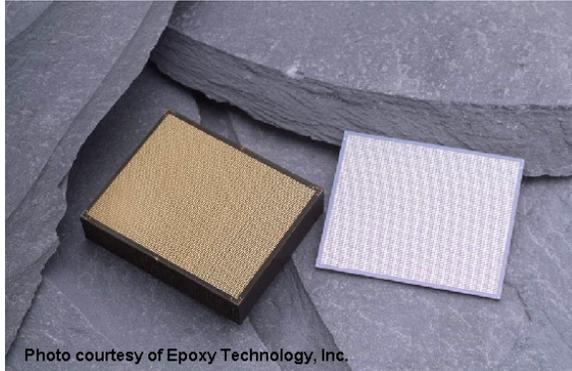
8000 I/O sensor array test chip (right) and 3D-silicon back plane multiplexer module (left) prior to assembly (~17mm X 21mm).
